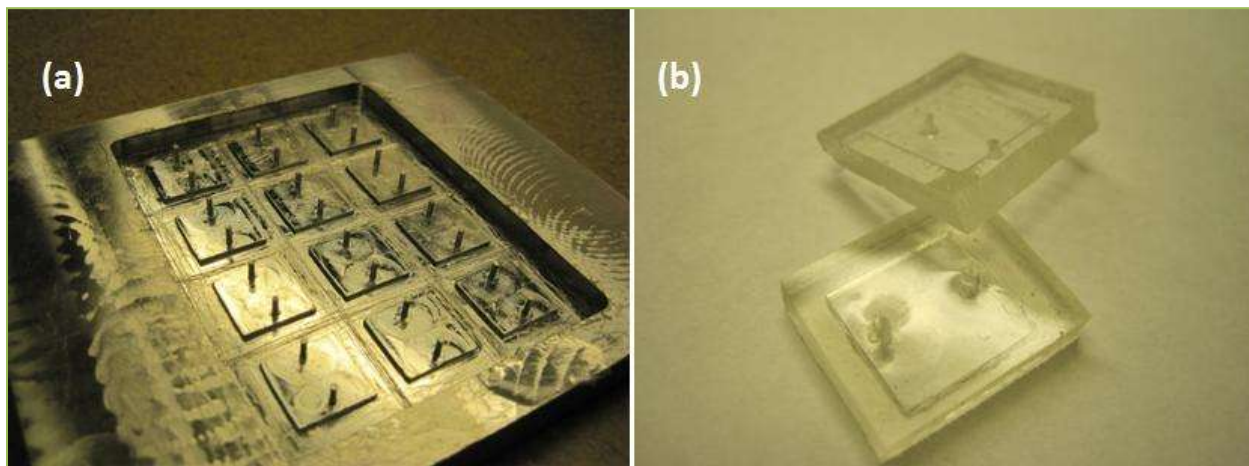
PDMS manifold for microfluidic encapsulation of analyte; (a) Master mold for making PDMS manifold, (b) PDMS manifold after peeling off from the mold.
